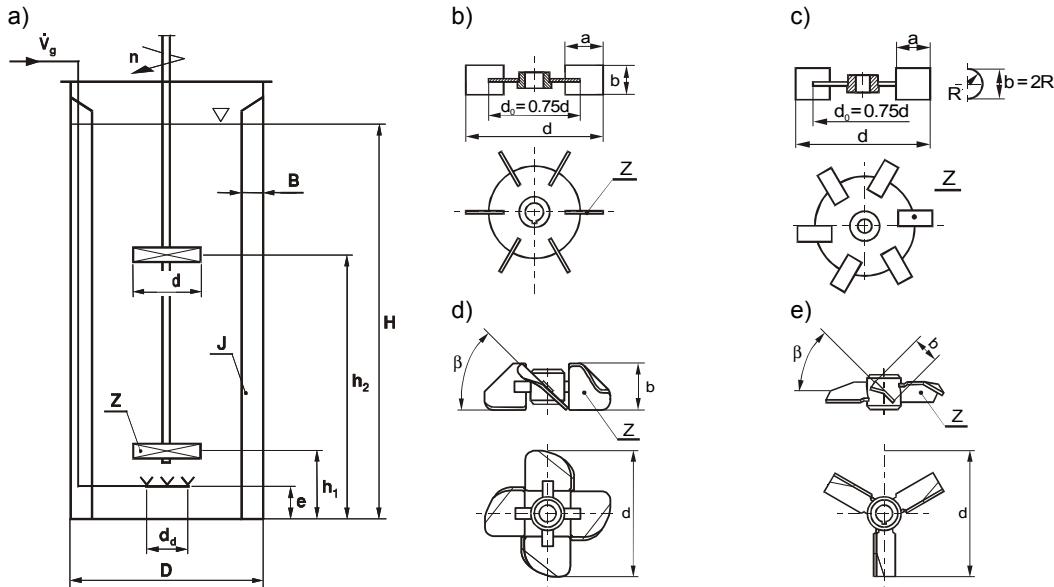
Agitated vessel and impellers used in the study; a) geometrical parameters of the vessel; b) Rushton turbine; c) Smith turbine (CD 6 impeller); d) A 315 impeller; e) HE 3 impeller
